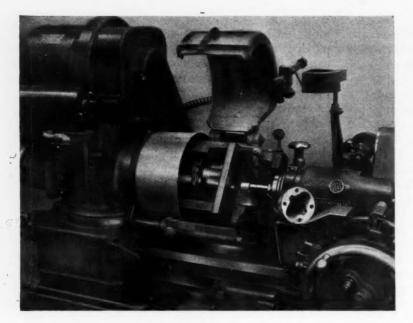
Grinding Two Semicircular Holes in a Universal Joint Housing without the Use of an Indexing Fixture
